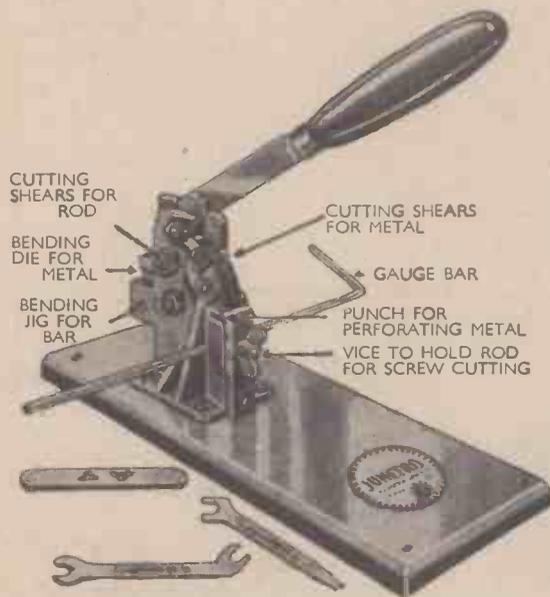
Showing how six separate tools are incorporated in the Juncero Tool.
